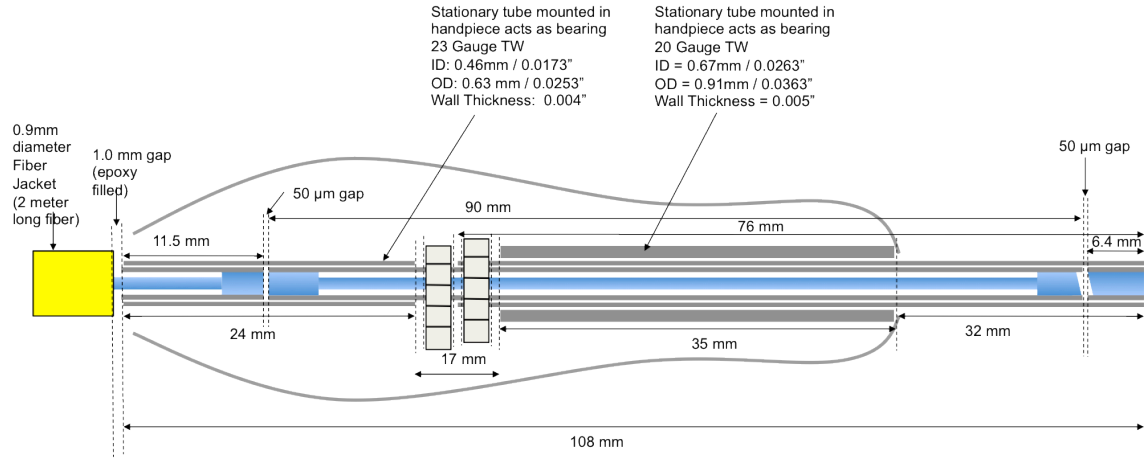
Tubing Assembly for 21/23 gauge hand-held probe
